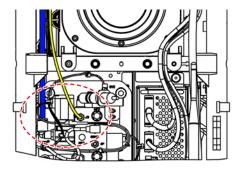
Pneumatic Tubing Connecting Pneumatic Manifold and Fluidics PCB Assembly
